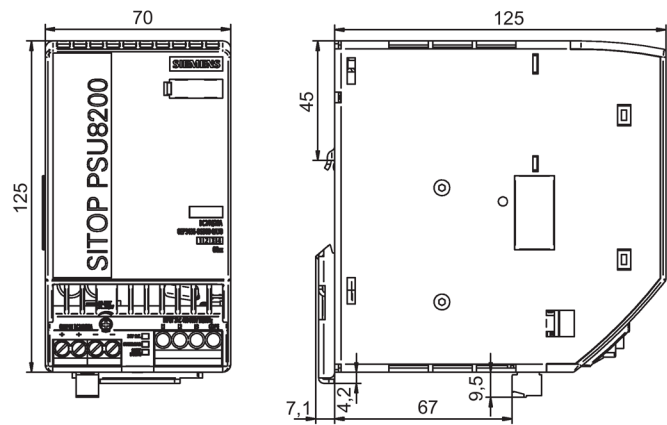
Dimension drawing 6EP3436-8SB00-0AY0
